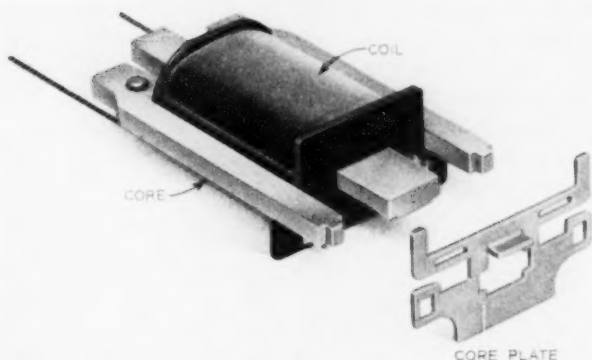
Legs of the core are held in alignment by the core plate, which is forced over the ends after the coil is assembled.
